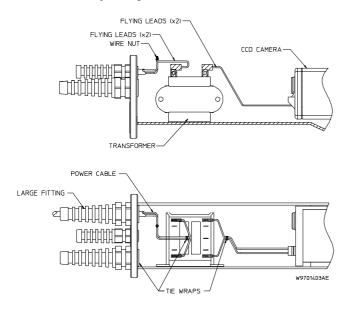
Liquid-Tight Fittings and Power Connector (Side & Top Views)
